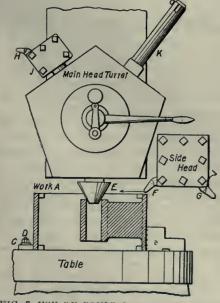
USE OF CONICAL LOCATING PLUG FOR CORED HOLES.
